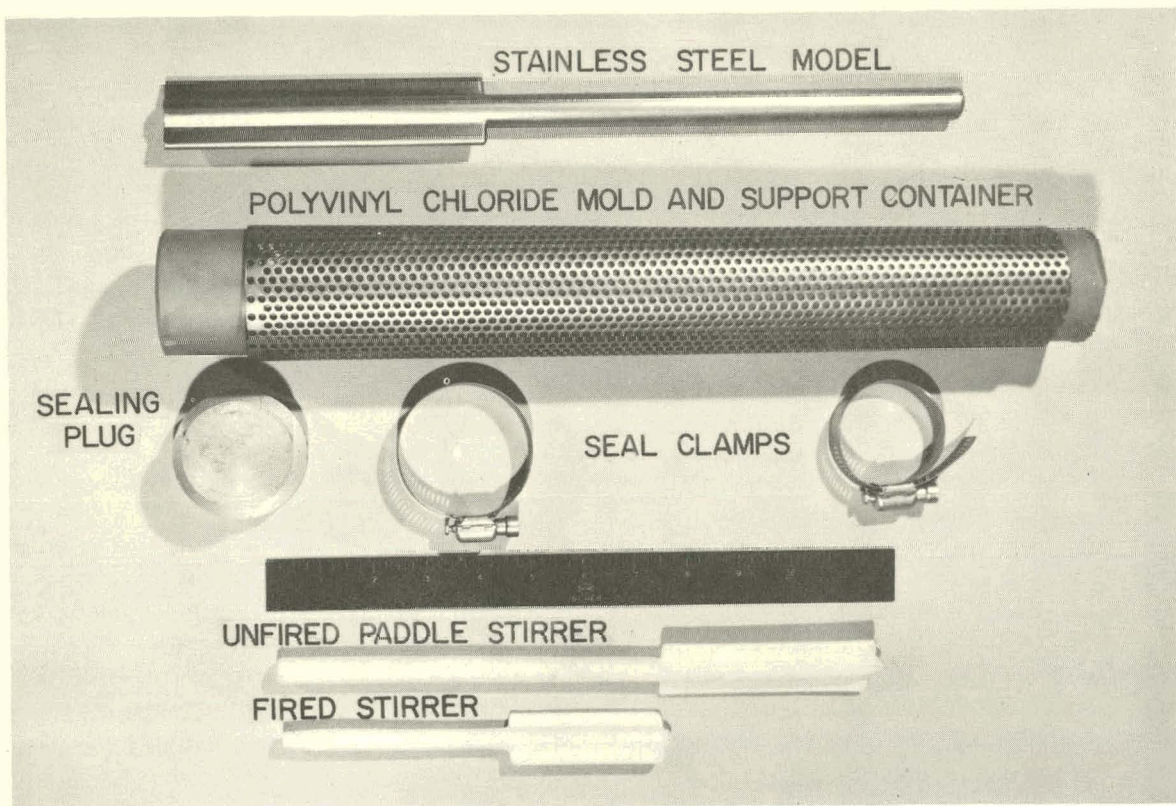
POLYVINYL CHLORIDE MOLD FOR PADDLE STIRRER
